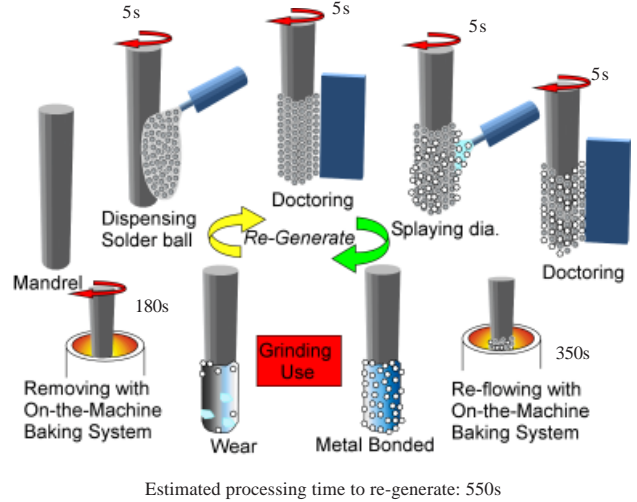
Composed on-the-machine tool re-generation for metal bonded abrasive tool
